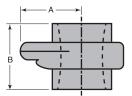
Butt Weld Schedule 160 and XXH Color Code: Blue Subs/Red Nut
